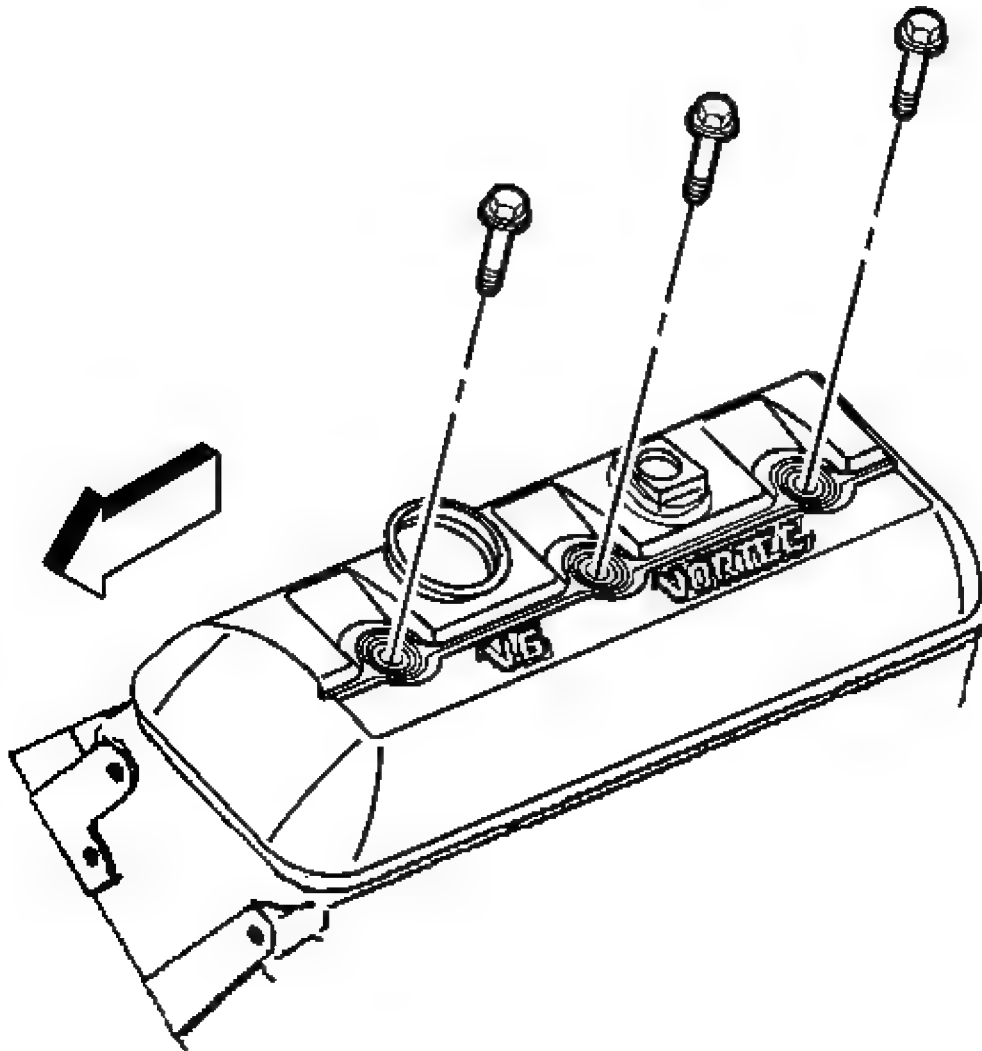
Locating Valve Rocker Arm Cover Bolts (Left)
